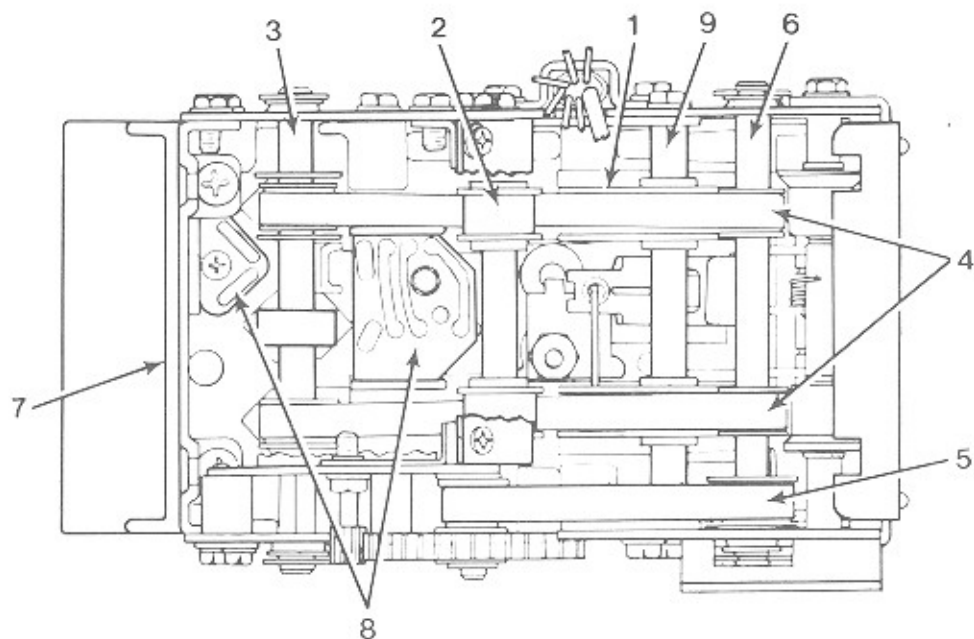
OBA-2 Transport Assembly (Sheet 2)
